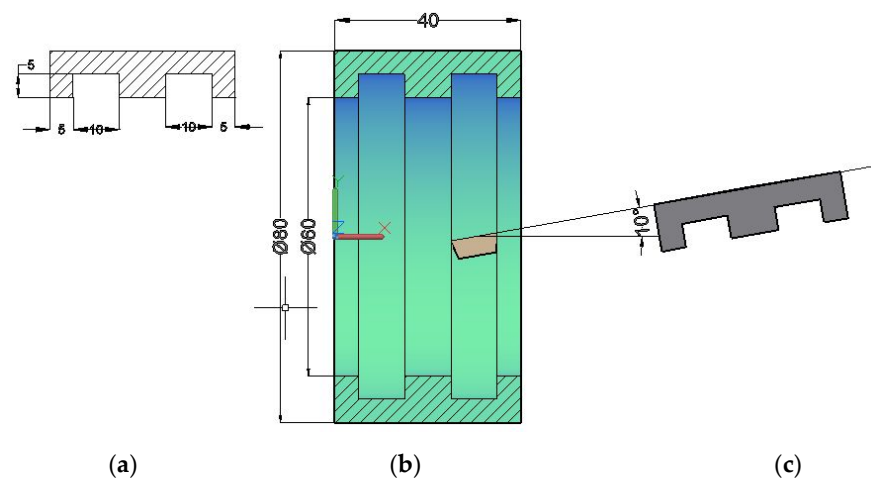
The cutting tool in the working position at the end of processing the inner profiled surface with radial feed rate; (a) front view; (b) side view; (c) 3D view.
